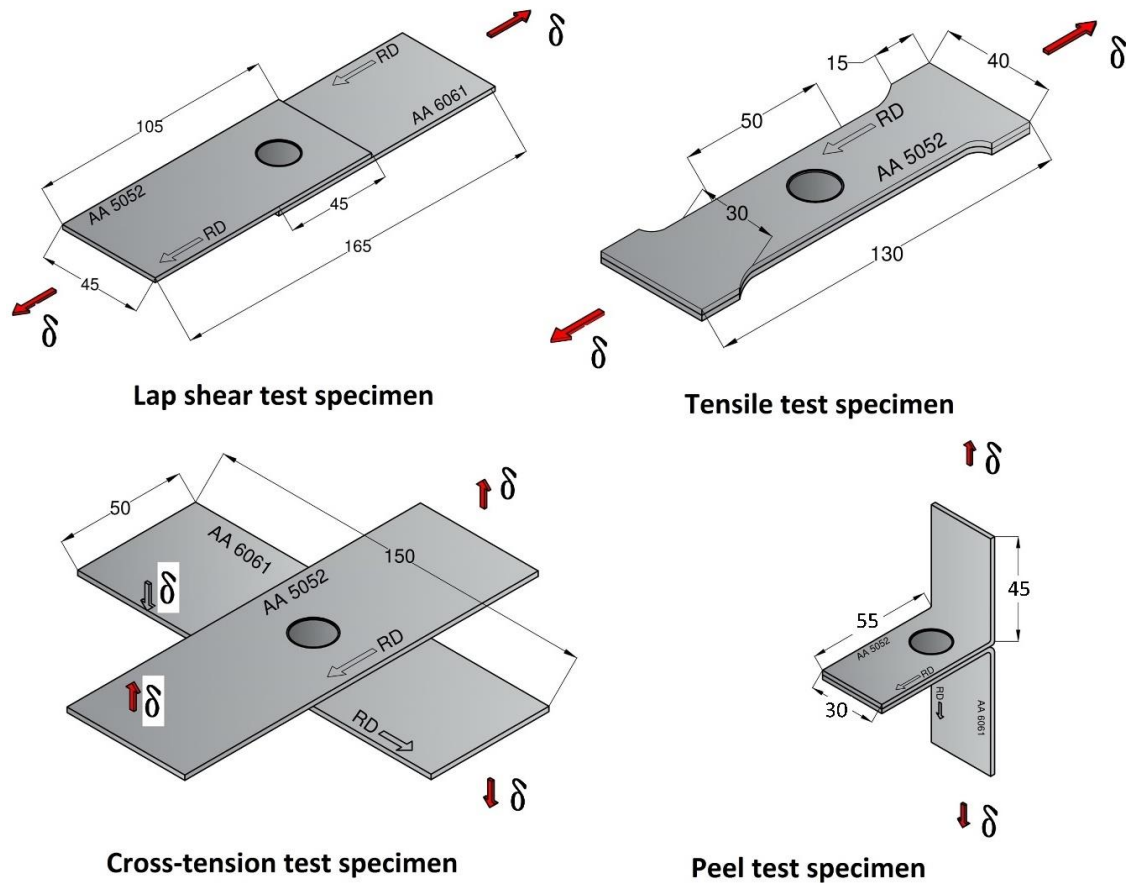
Dimensions of the test samples for various mechanical tests (All dimensions are in mm, Not to scale)
